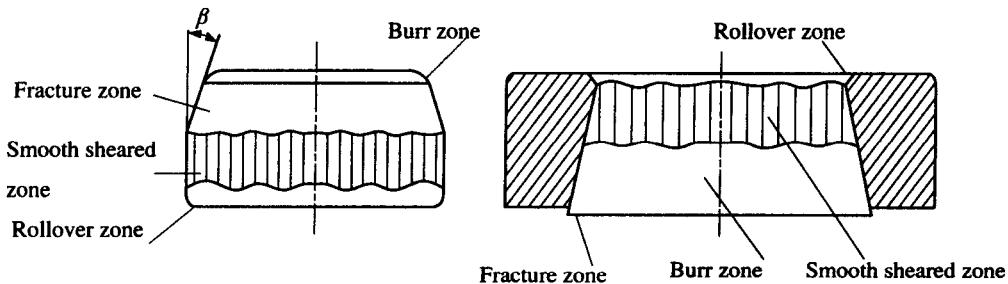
Characteristic of the cutting cross-section of blanking workpieces
